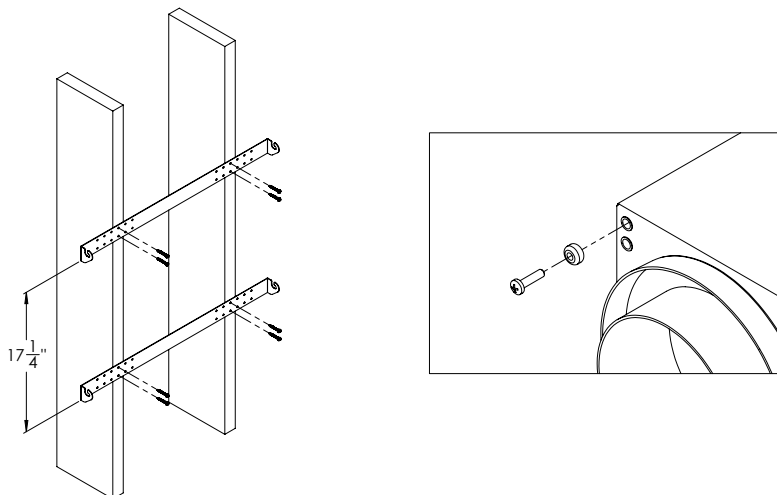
VERTICAL INSTALLATION ON A WALL OR PANEL
